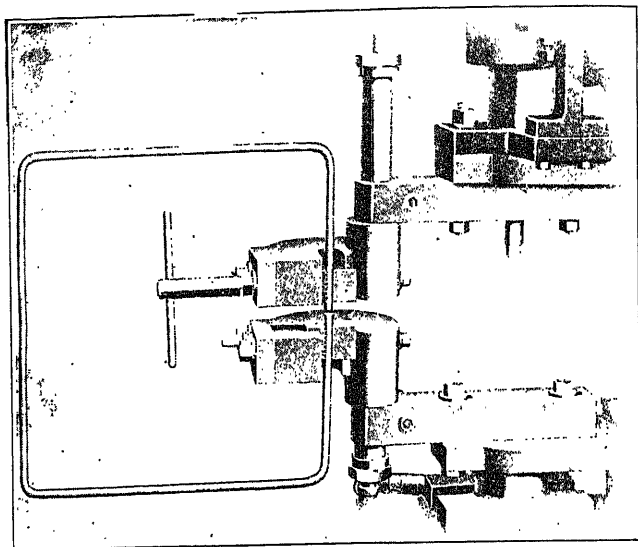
Butt-Welding Attachment for a Spot-Welding Machine.
